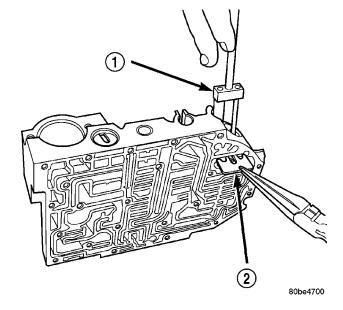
Remove Dual Retainer Plate using Tool 6301
